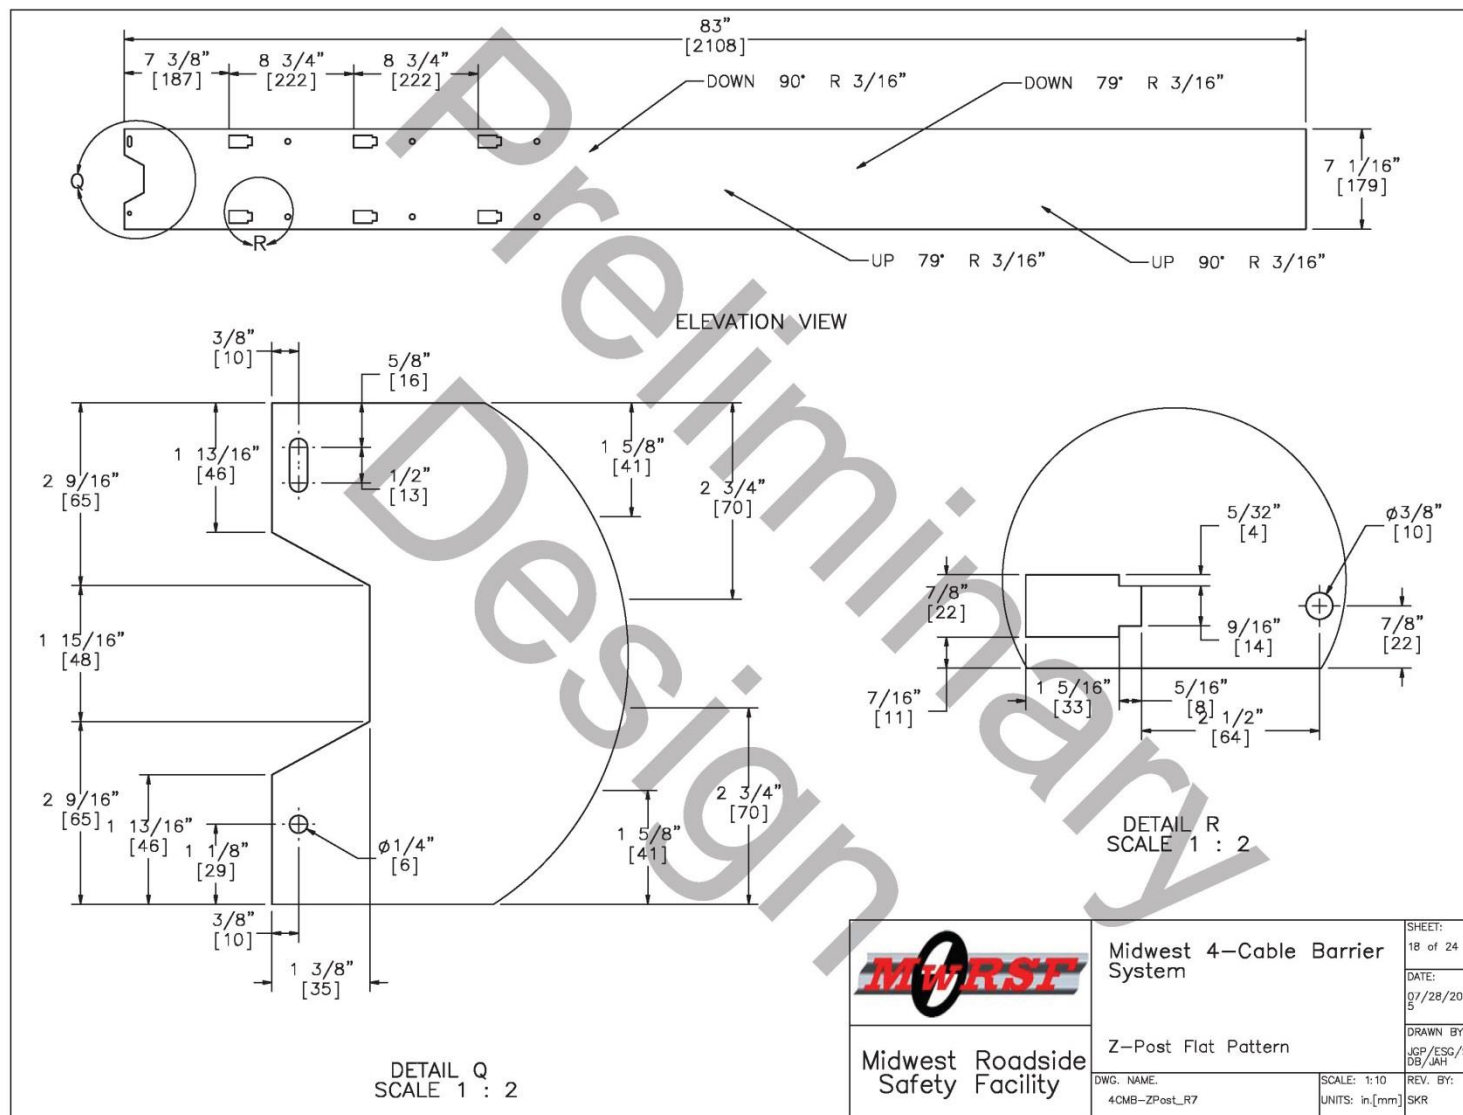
Z-Post Details, Flat Pattern, Test No. MWP-1
